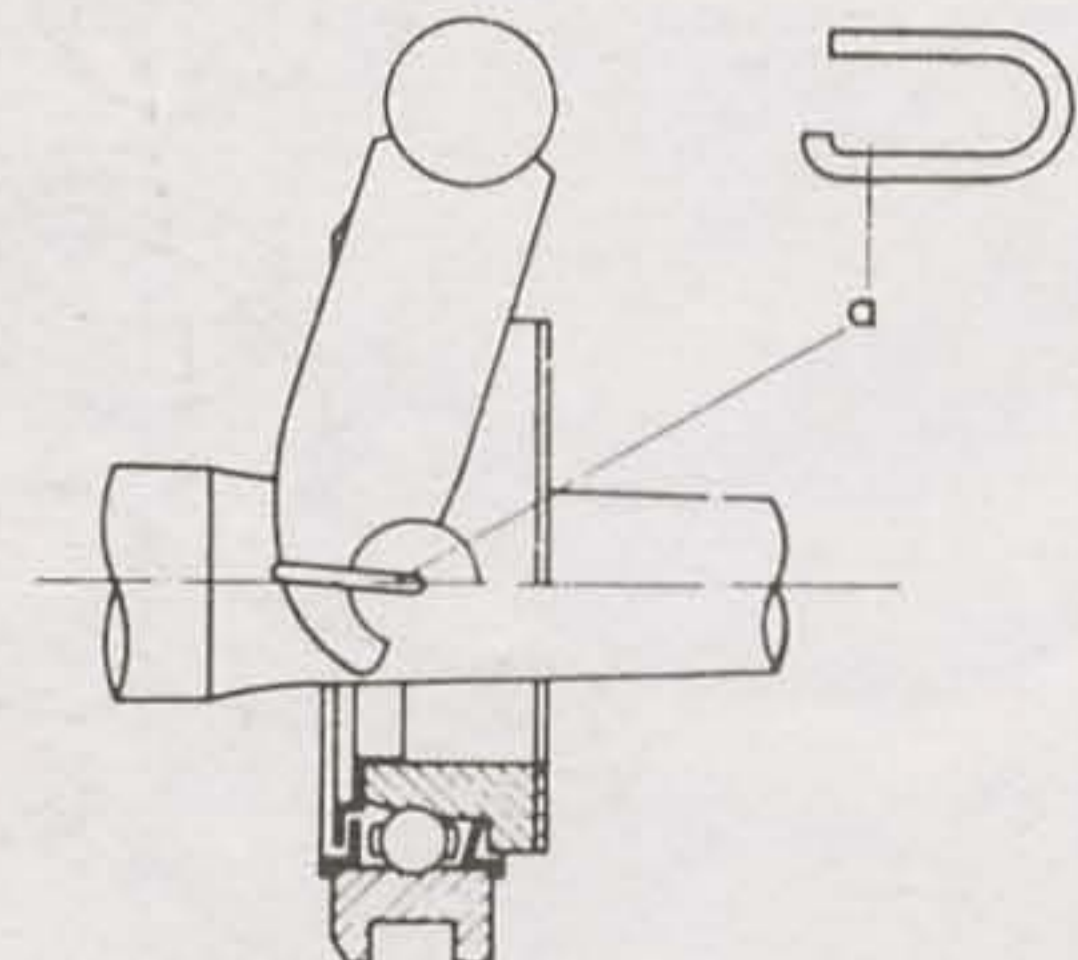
CLUTCH RELEASE BEARING. CROSS SECTION SHOWING SHAPE AND LOCATION OF RETAINING CLIP (a)
